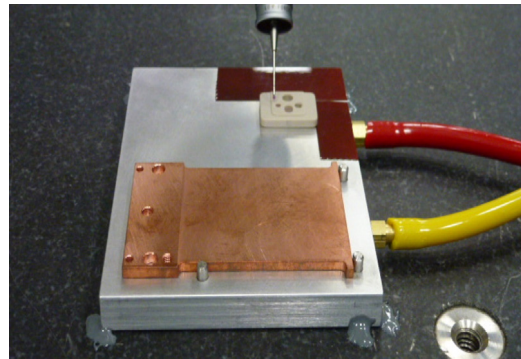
Inspecting the inserts. The mounting inserts were held on a fixture using its vacuum channels.
